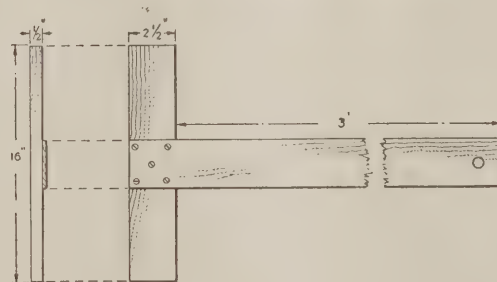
Method of Fastening the Blade to the Head of a T-Square.
